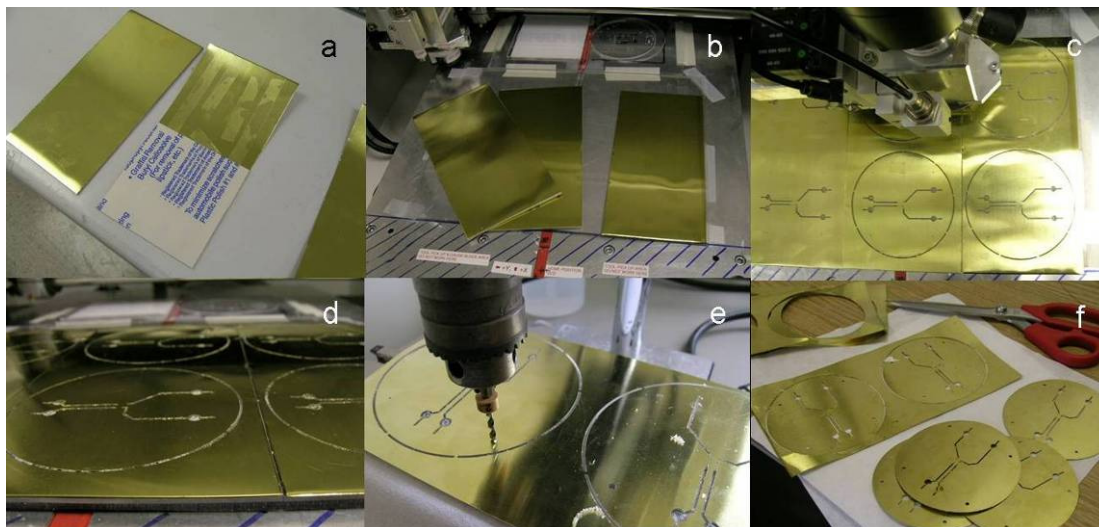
Shadowmask generation steps in pictures. (a) Mounting brass shim stock to sacrificial underlayment, (b) Loading into CNC router, (c) Milling the masks, (d) Masks post-milling, (e) Drilling periphery mounting holes, and (f) Cutting out final product.
